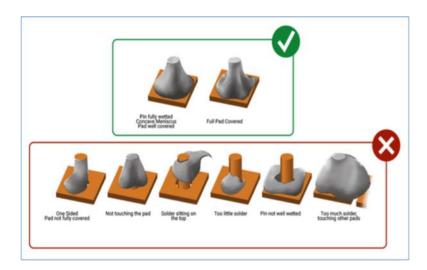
Soldering according to J-STD-001 for Soldering
